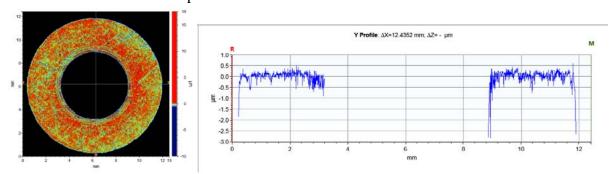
Turbo Thrust Washer: 3D Compressor Side
